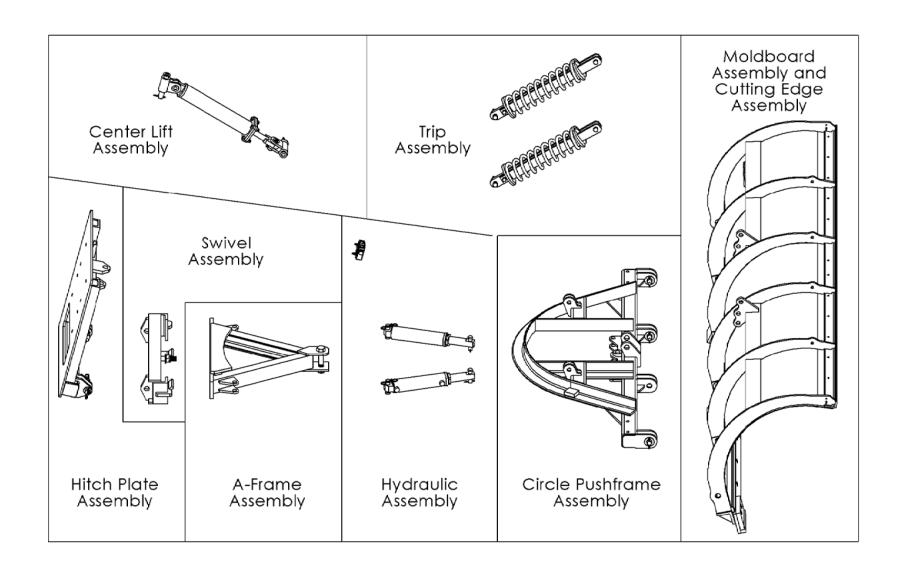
JRB WL & LB – Large Assembly View
